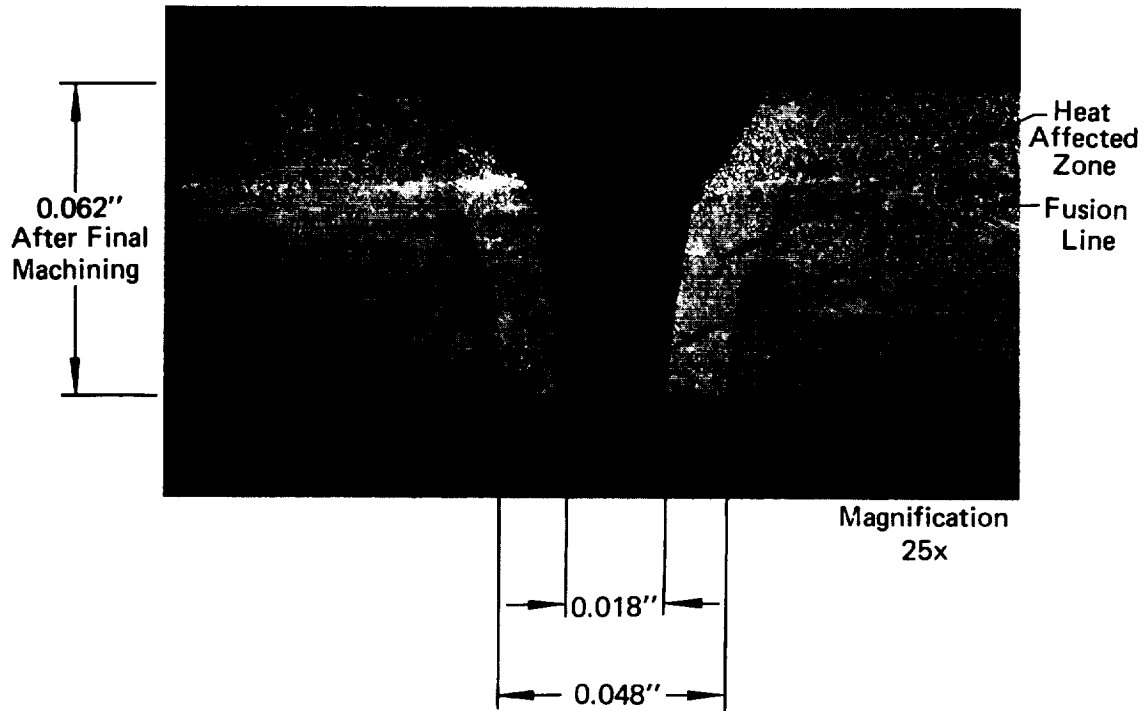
WELDMENT FRACTURE SPECIMEN (PART I)
